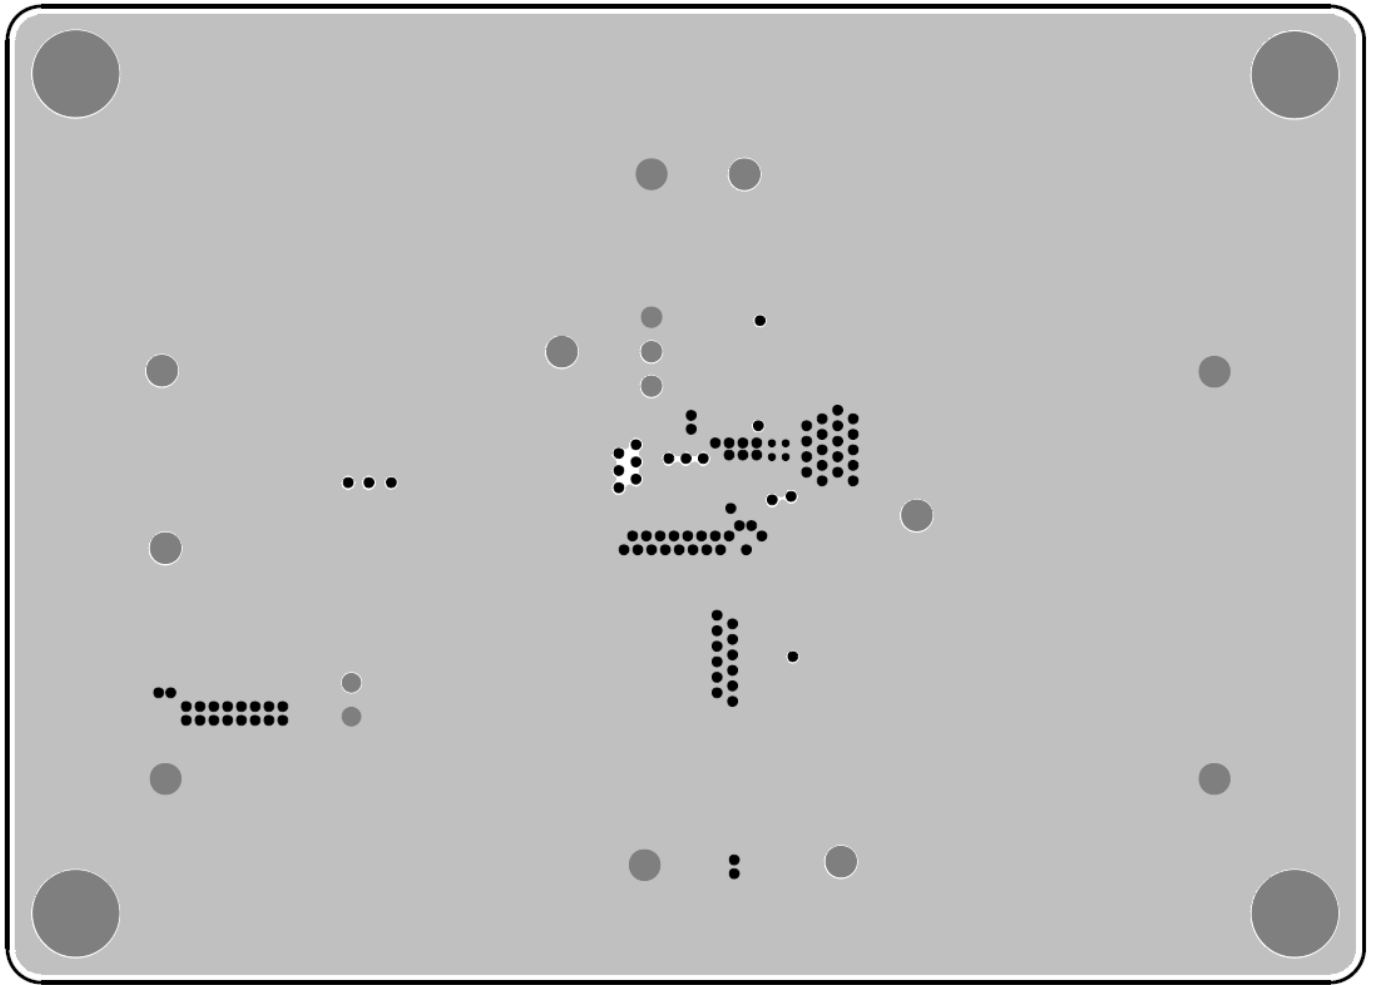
PCB Layout—Inner Side (3<sup>rd</sup> Layer)
